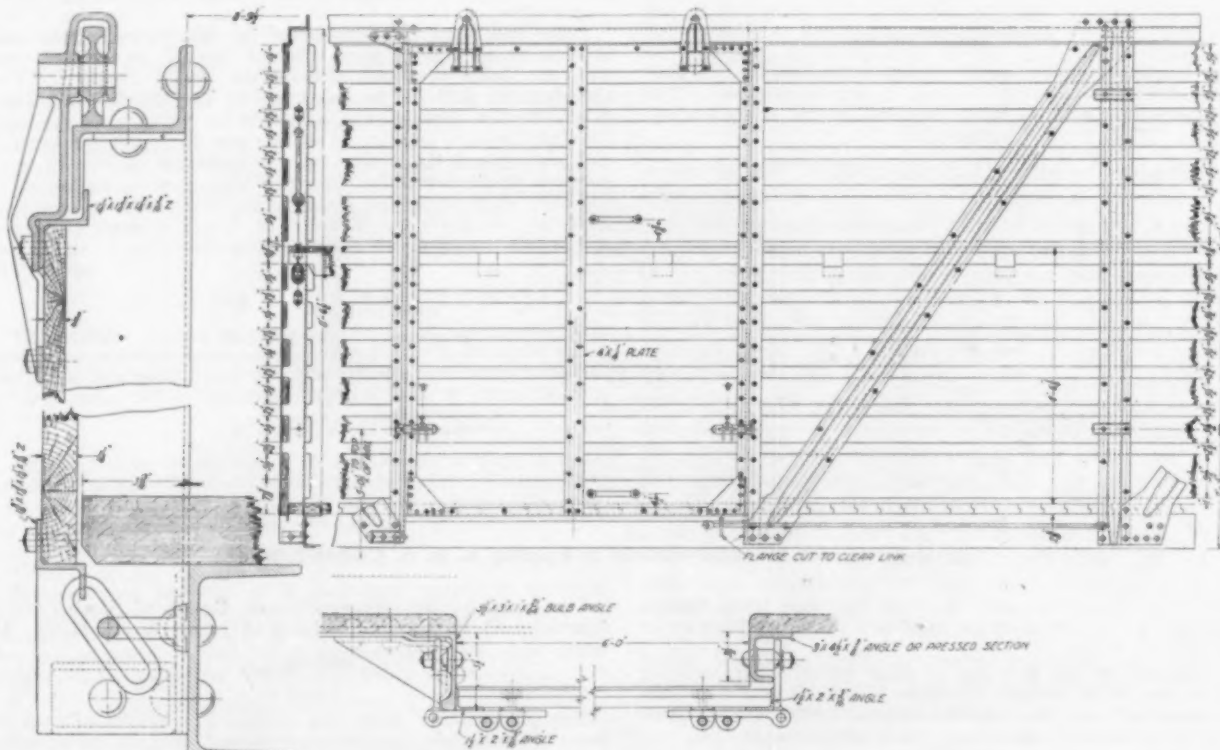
Side Door Arrangement for Proposed Standard Stock Cars
